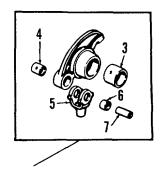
VALVE AND INJECTOR OPERATING MECHANISM
